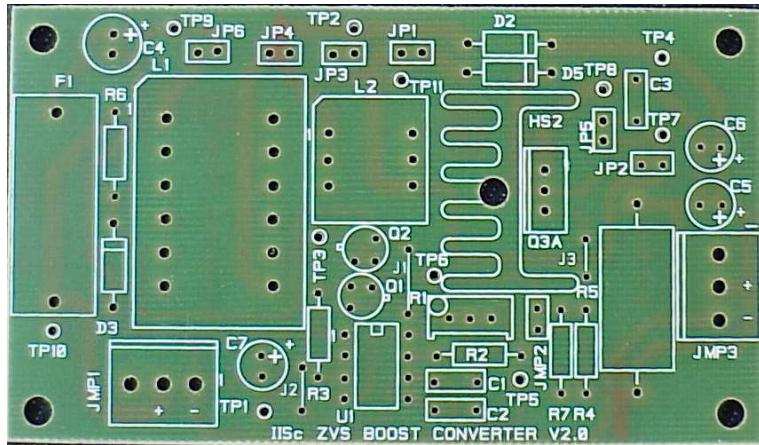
Bare PCB Board of ZVS-Boost Converter
